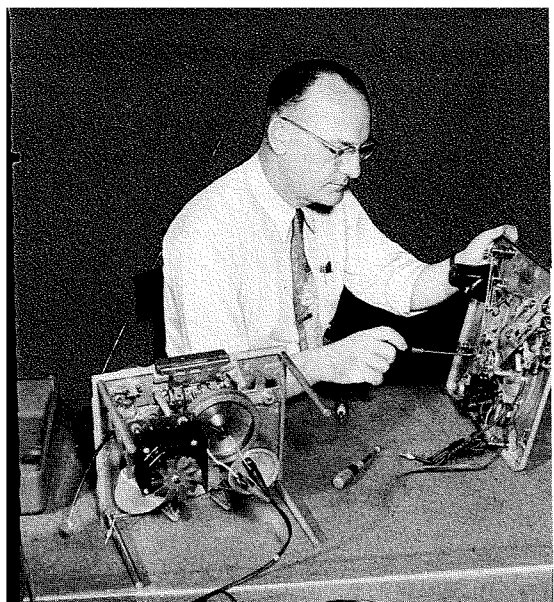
Roland Di Sabatino, mechanical engineer of the Radio and "Victrola" Division is shown adjusting a three-speed automatic record-changer mechanism.
